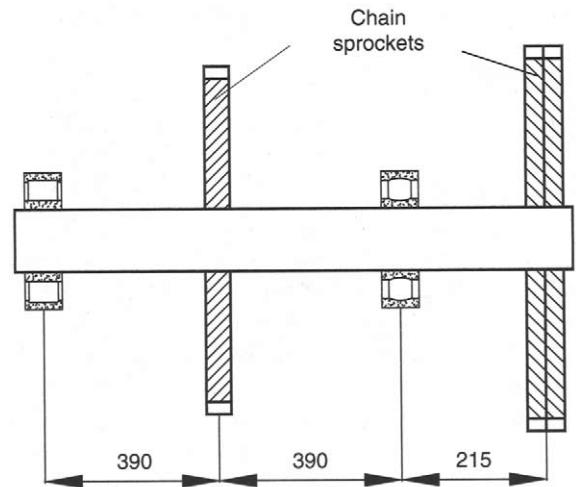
Chain conveyor drive shaft (dimensions in mm).
